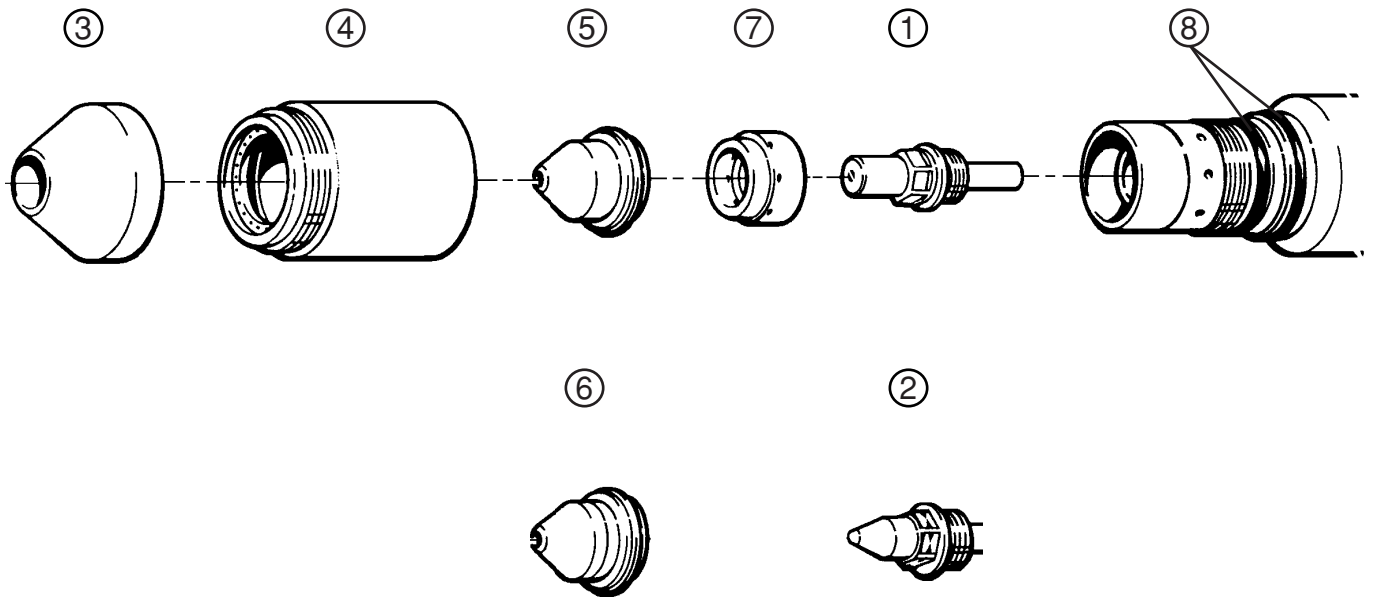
PAC160E Gouging Torch Consumable Parts
